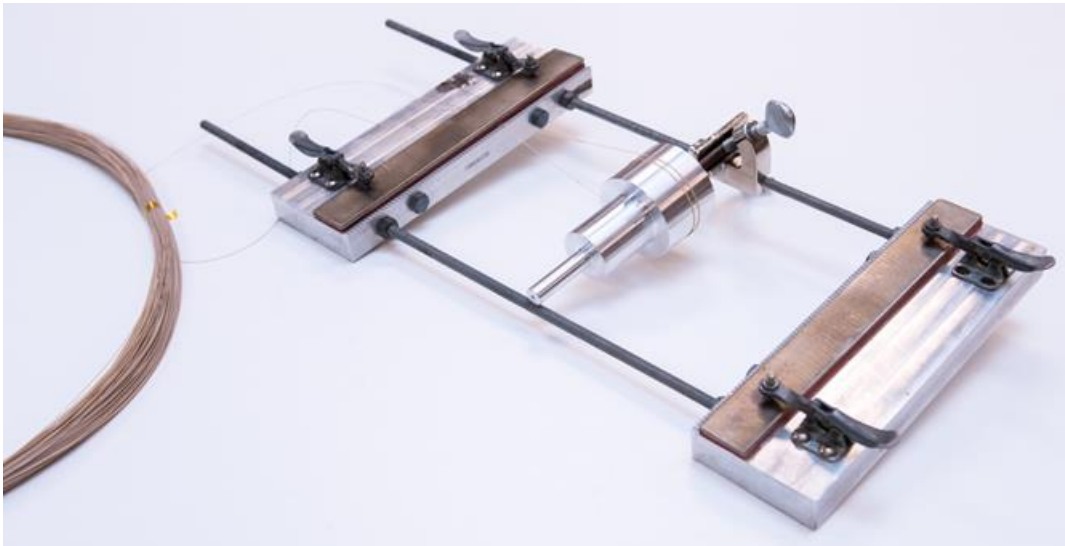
Test fixture used for bend radii testing. The Multiple radii test cylinder is in the middle of the fixture, and the silicone padded spring-loaded clamps are on the ends.
